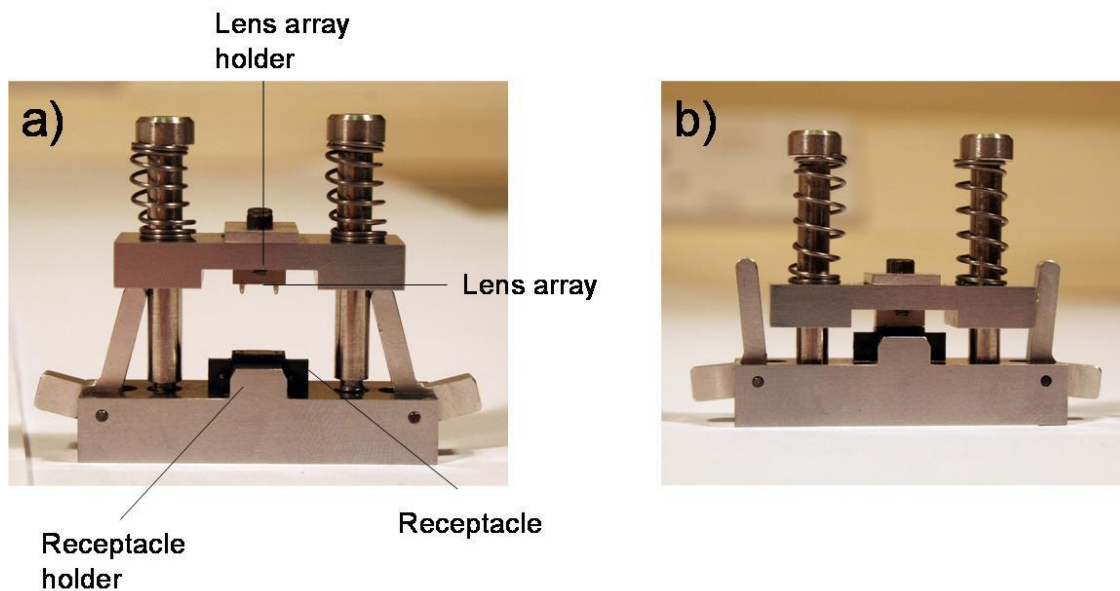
Mechanical lens assembly jig A designed to align the Omron microlens array into the custom receptacle a) open position, b) engaged position
